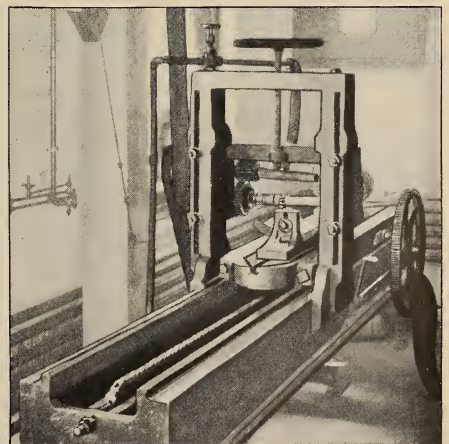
MILLING MACHINE WITH CHAIN FEED
